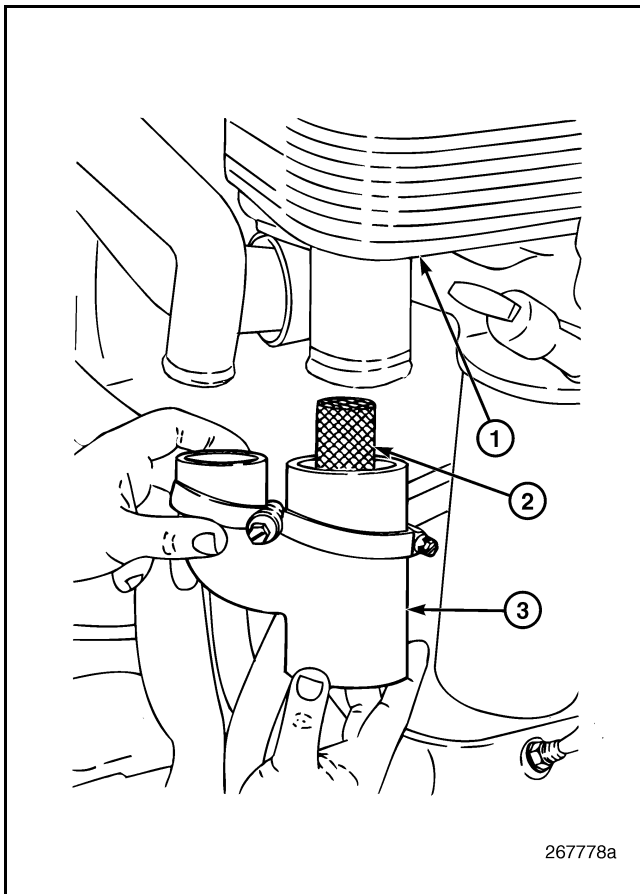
Y-Hose, Coolant Screen and Oil Cooler Inlet
